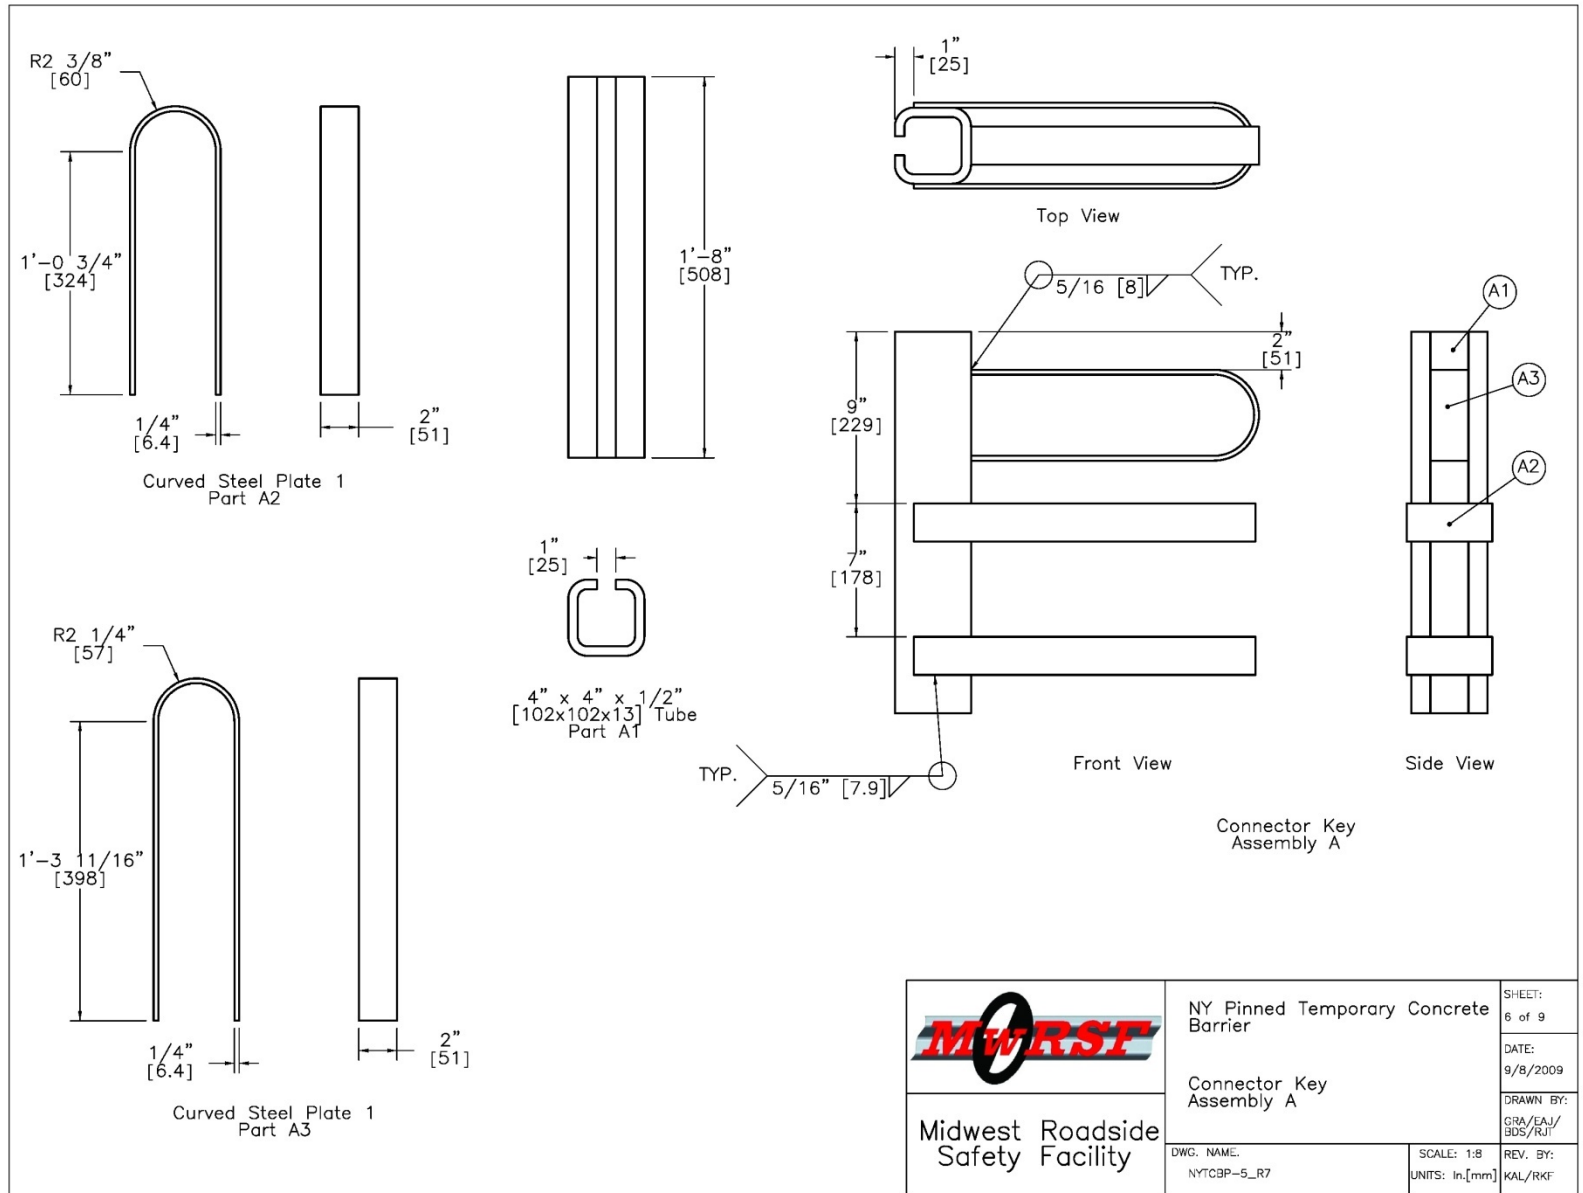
Temporary Concrete Barrier Connector Assembly Details, Test No. NYTCB-5
